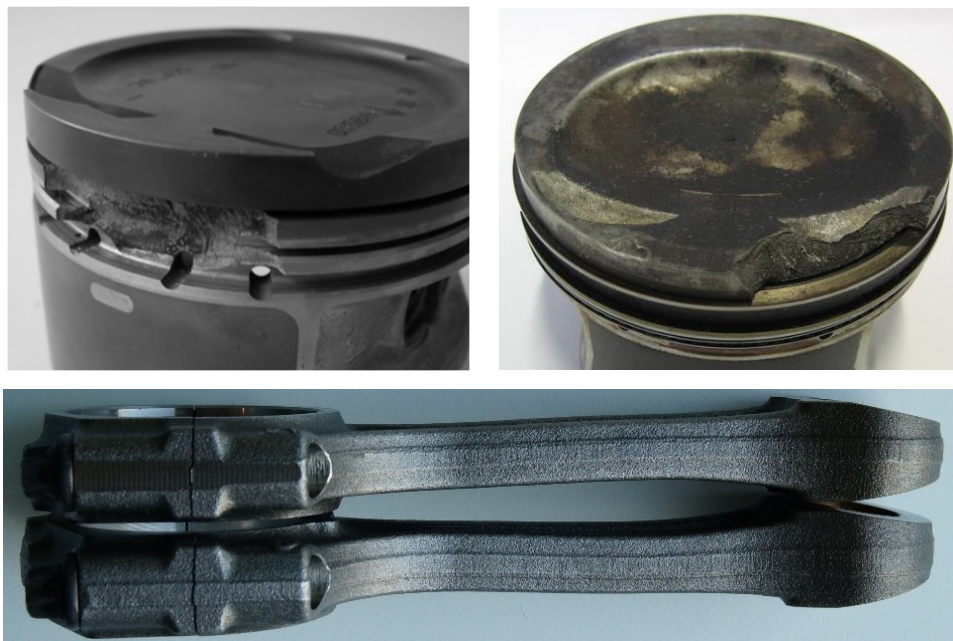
Damages of different engine components due to the thermal and mechanical overload caused by pre-ignition: broken piston lands close to oil drain holes [8] (upper left), broken piston top land close to a valve pocket (upper right), deformed connecting rods (bottom)
